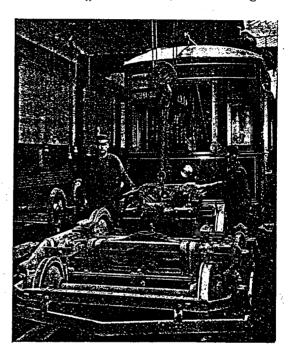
Removing a 65-h.p. Box Frame Motor from the Truck.
